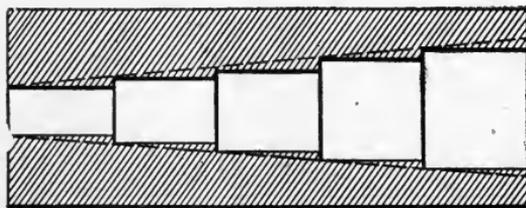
Method of Stepping Holes before Using Taper Reamer
